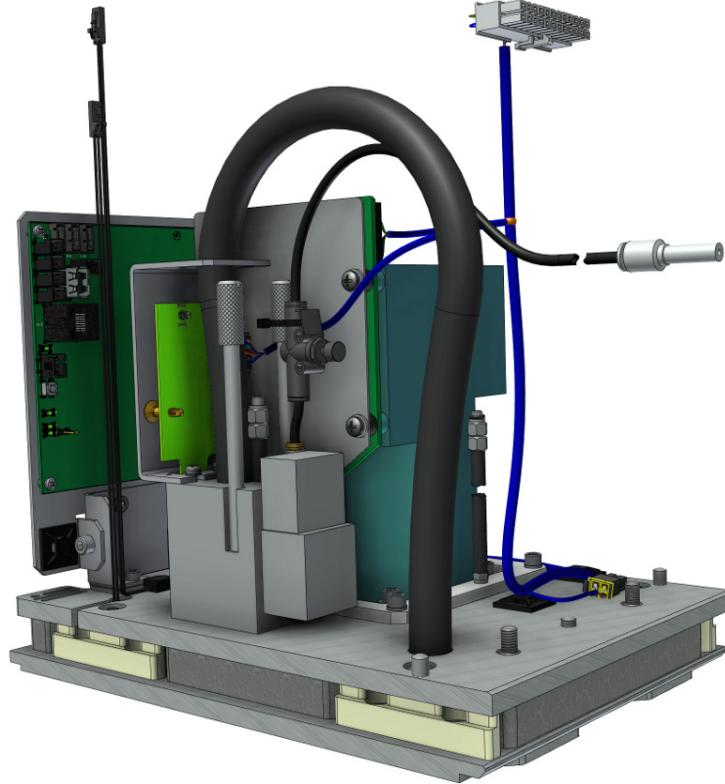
Q4202-50 Receiver Assembly showing the air gap sensor (front)
